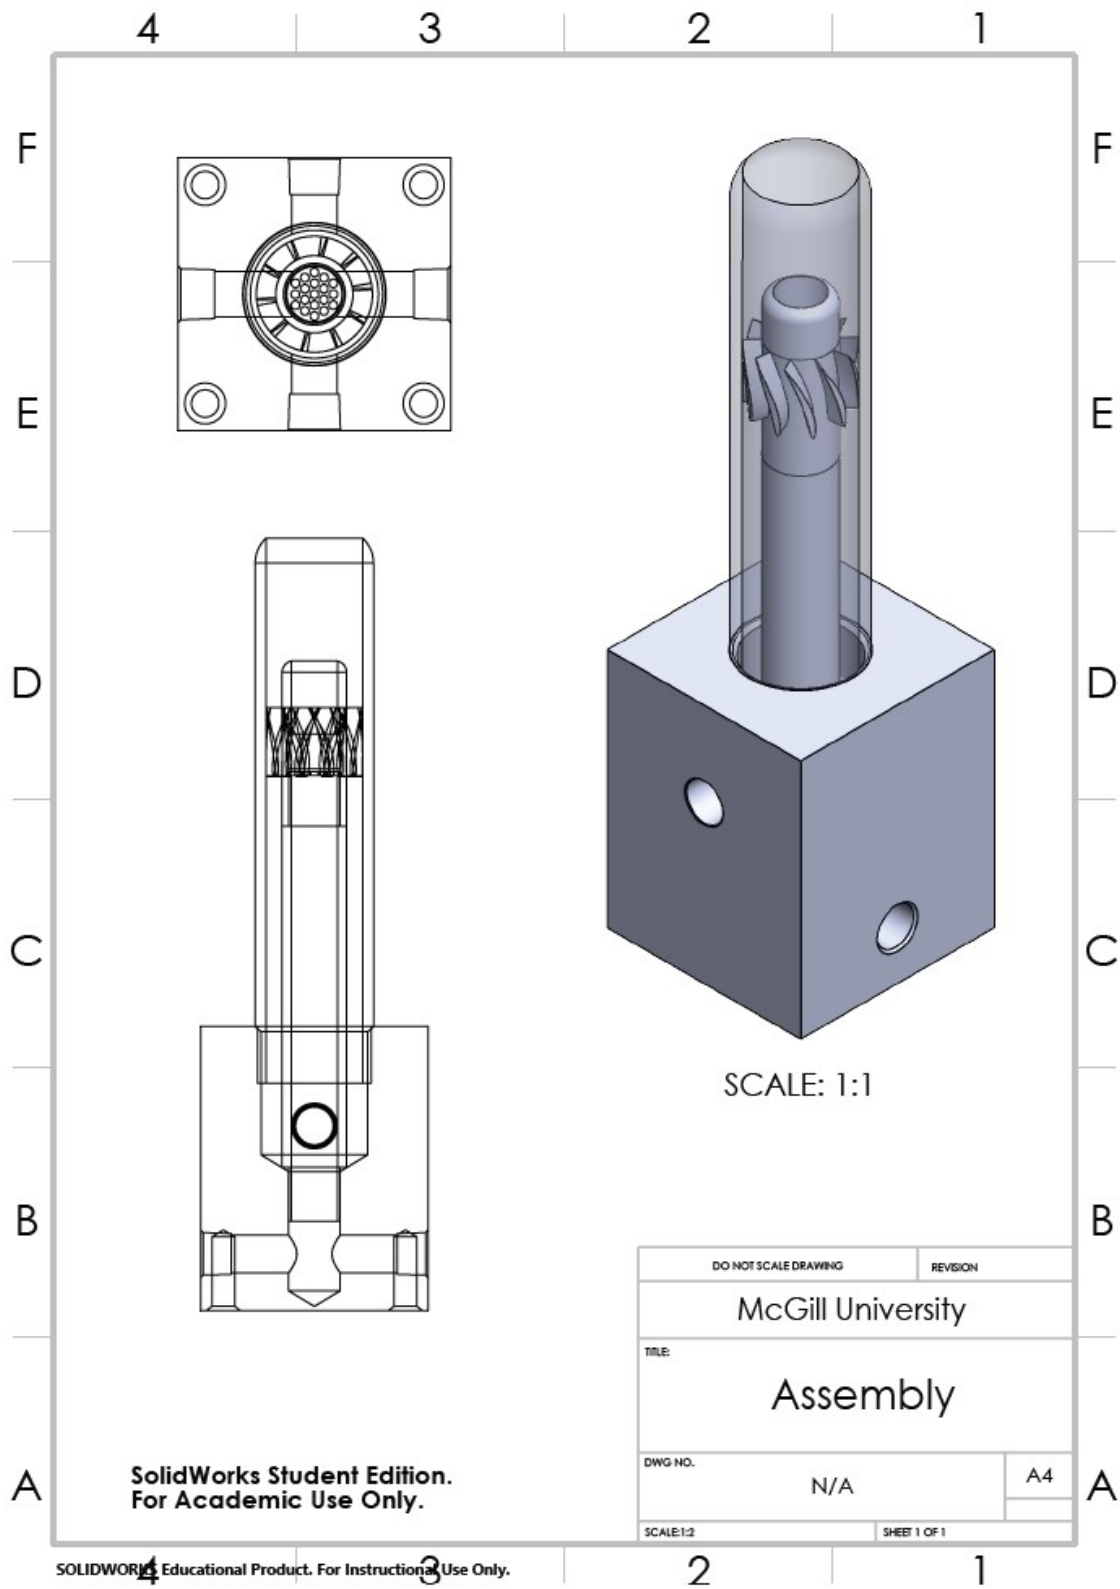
Assembly drawing of fully-controllable low-swirl burner.
